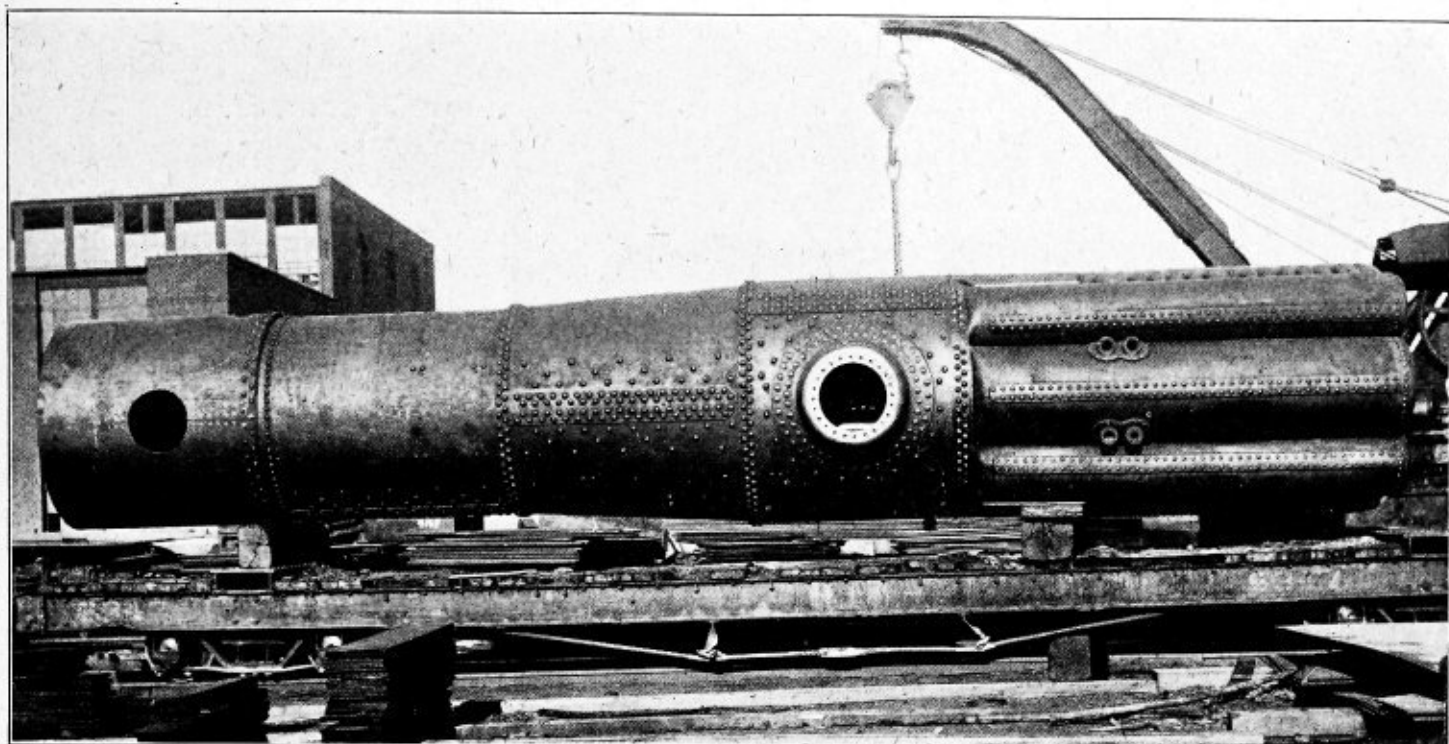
Top View of Boiler, Showing Steam Chambers Forming Top of Firebox
